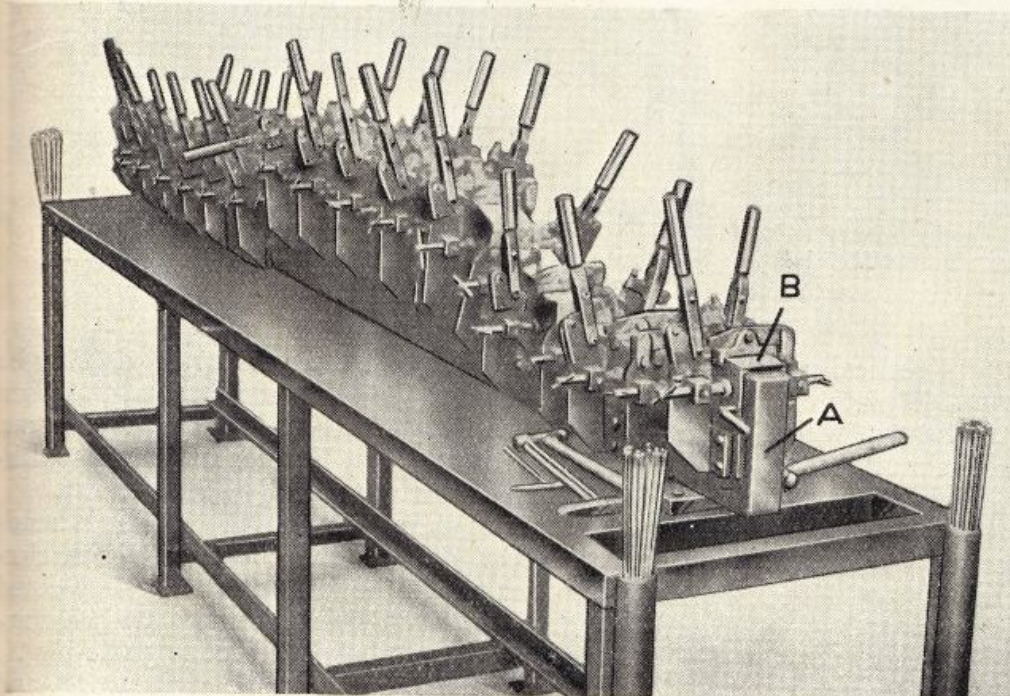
Tack Welding Jig in the Chassis Frame Section of the Works. It is used for Assembling the Bottom Plates to the Side Plates of the Box-type Main Chassis Frame Members. Toggle Clamps hold the Members together
